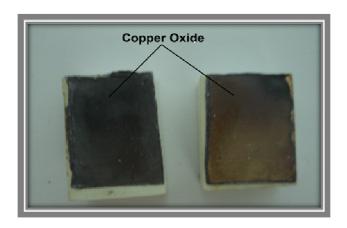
Photographic illustration of copper- alumina joint sample, shows the diffusion and joining of copper oxides to alumina and fracture in metal
